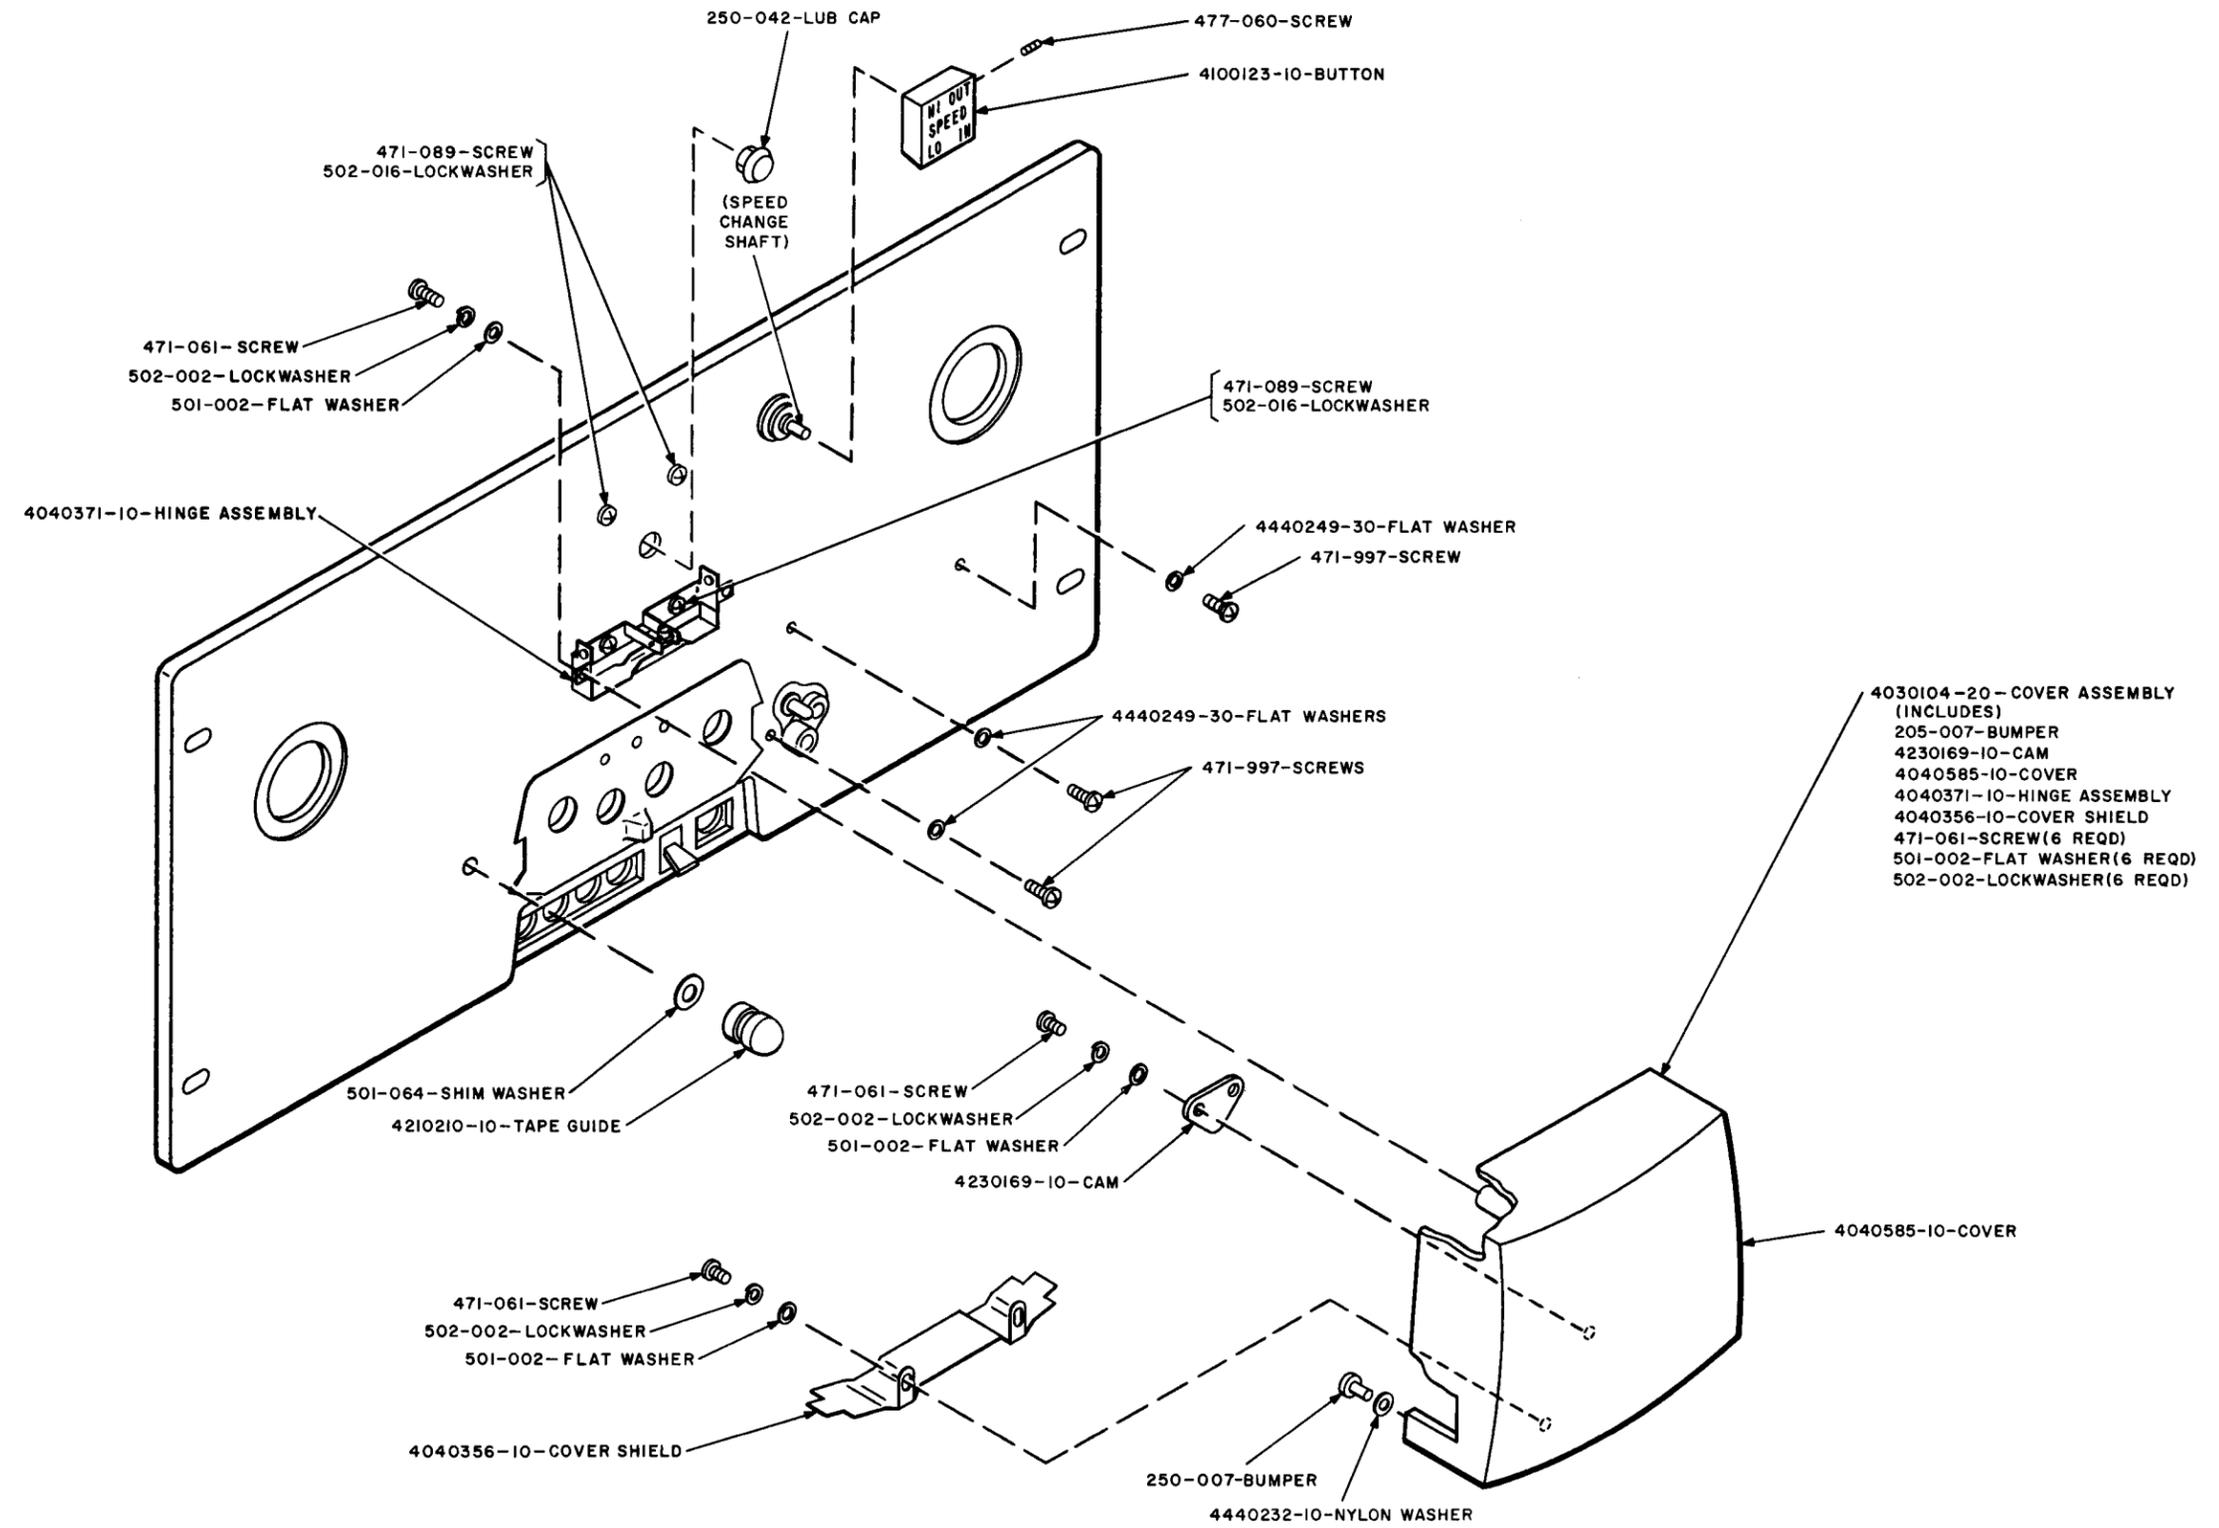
Record-Reproduce Mechanism—Removal of Cover Assembly and Miscellaneous Parts
